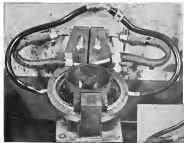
Tail wheel cone in place ready for heating. Outer heat transfer quenching oil and inner heat transfer distilled cooling water through coil.
